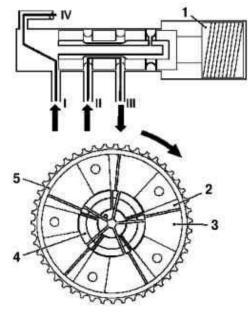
Wiring the supply line to the oil guide chamber "B" regulator of camshaft: 1 - electromagnetic hydraulic valve, 2 - Camera «A»; 3 - camera «B»; 4 - rotor, 5 - stator
